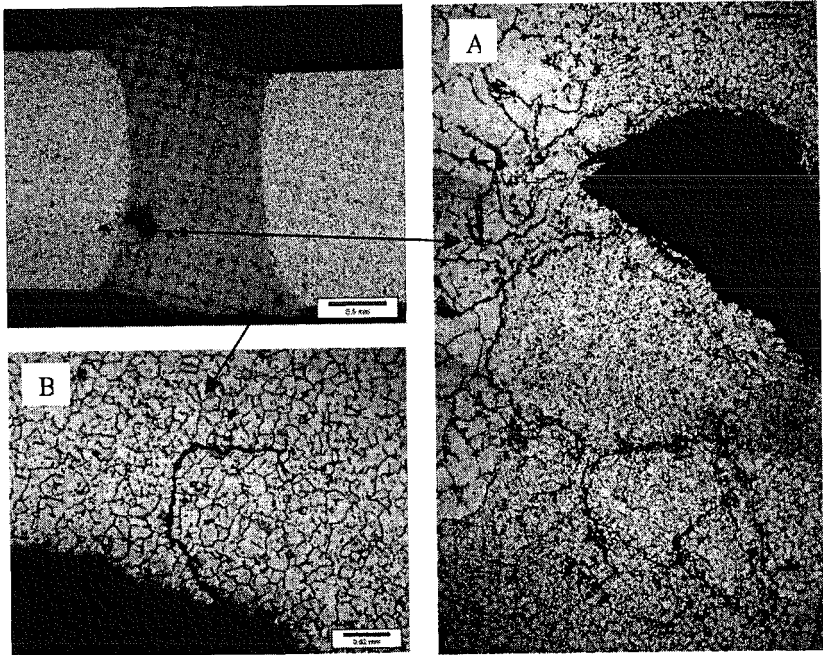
Solidification Cracks in the Sample Welded at 0.2 mm Gap (Middle Section)
